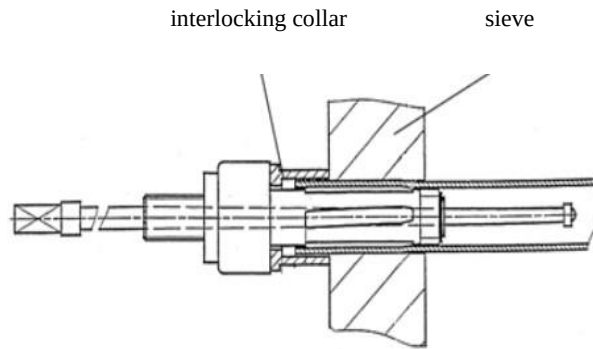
Diagram of the tube reeling machine with the tube in one of the hole in the test plate
